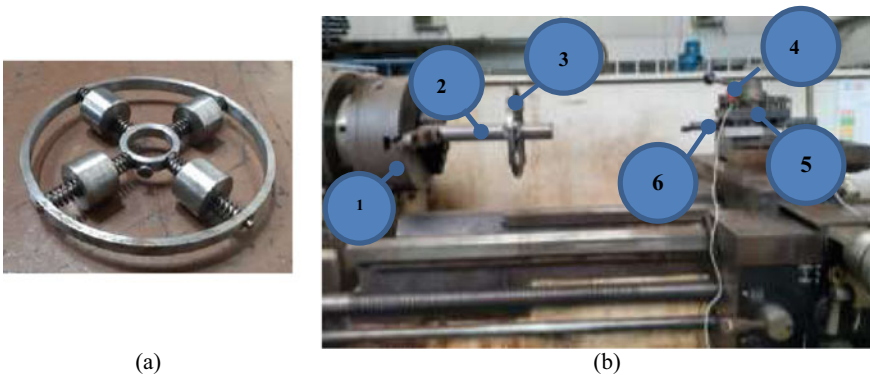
a Manufactured SRVD. b Equipment installation during the experiment (1) Spindle and chuck; (2) Workpiece; (3) SRVD; (4) Accelerometer probe; (5) Turret; (6) Boring bar Bode diagram of the main system at L/D ratio
